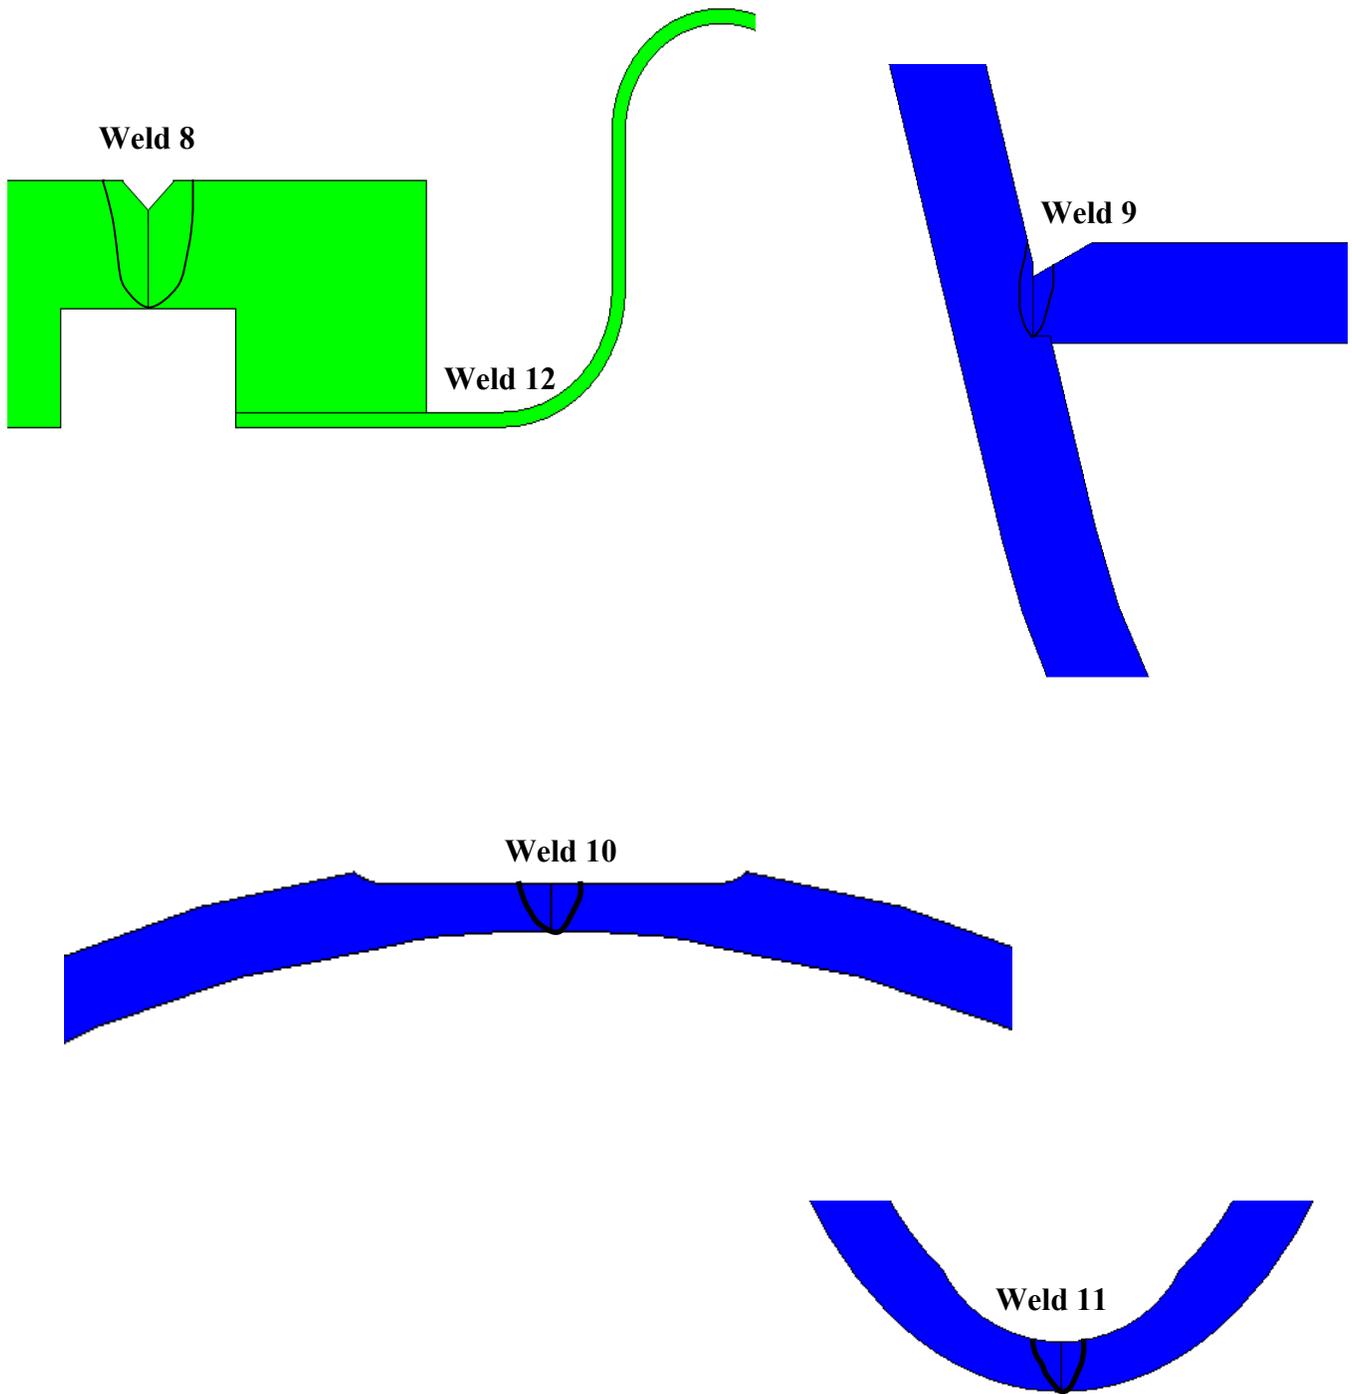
Assumed fusion zones – welds 8 - 11
